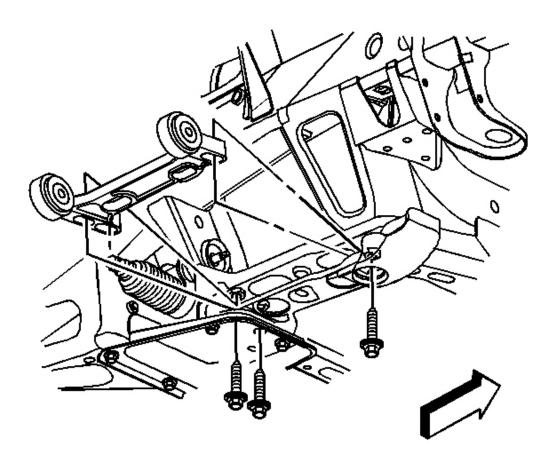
Removing/Installing Lower Control Arm Bracket Courtesy of GENERAL MOTORS CORP.
